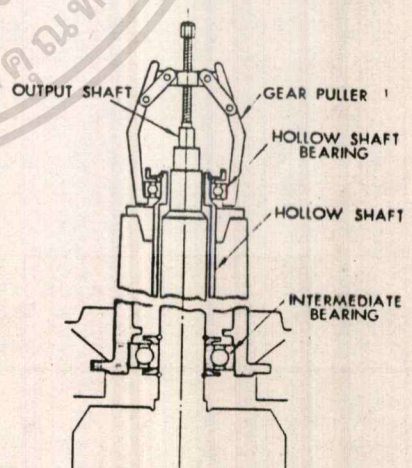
Removal of Hollow Shaft Using Gear Puller
